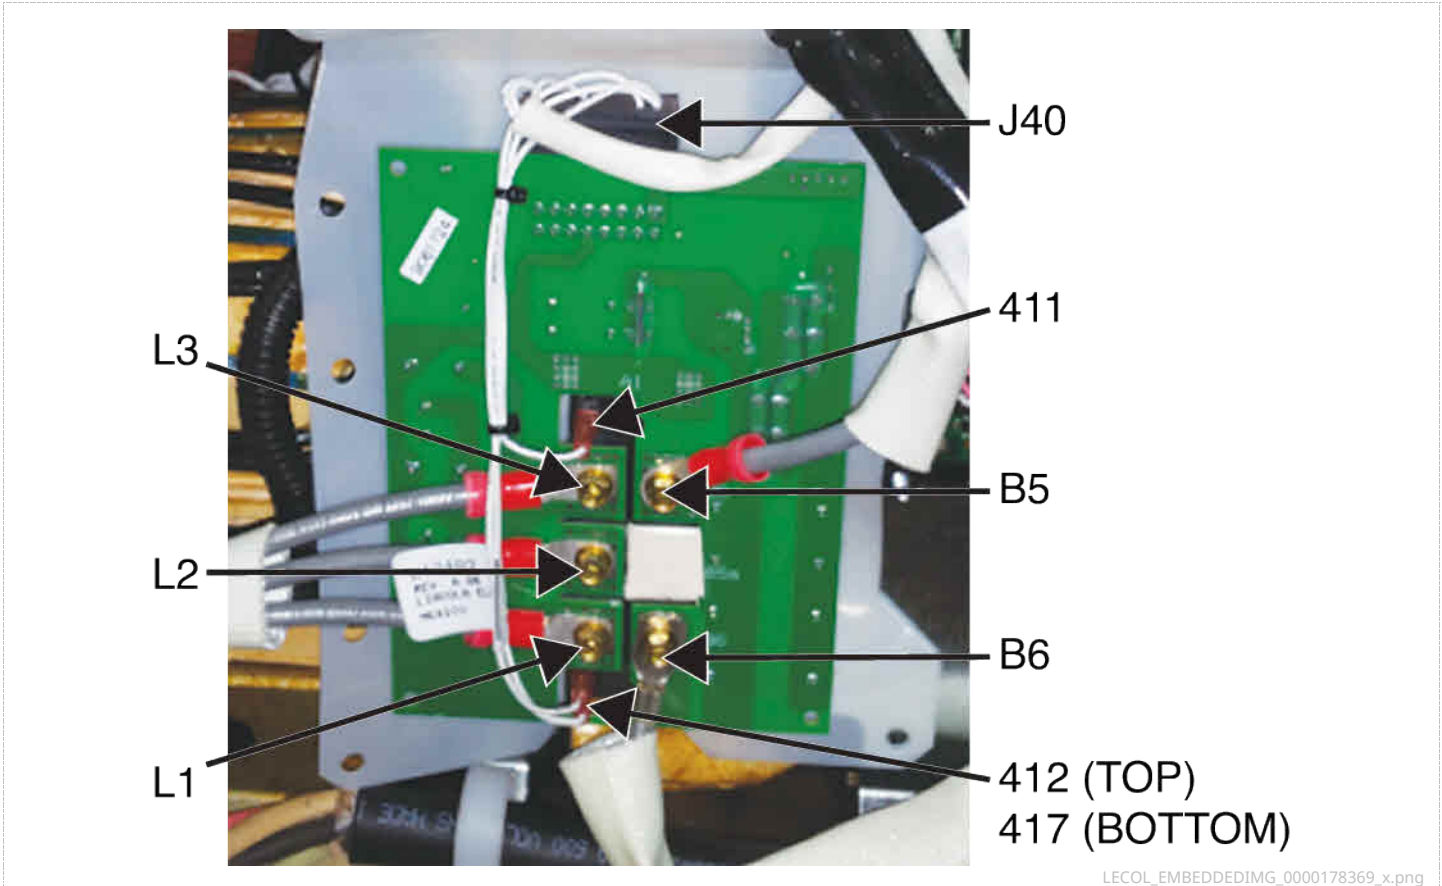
SCR (pre-charge) board plug J40 and input rectifier lead and plug locations
